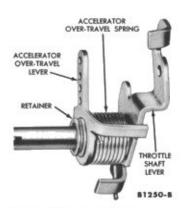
Accelerator Over-Travel Spring and Lever Installation
